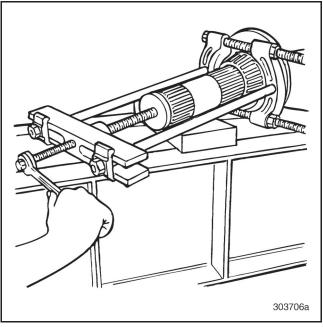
Removing Rear Bearing Cone from Main-Drive Shaft
